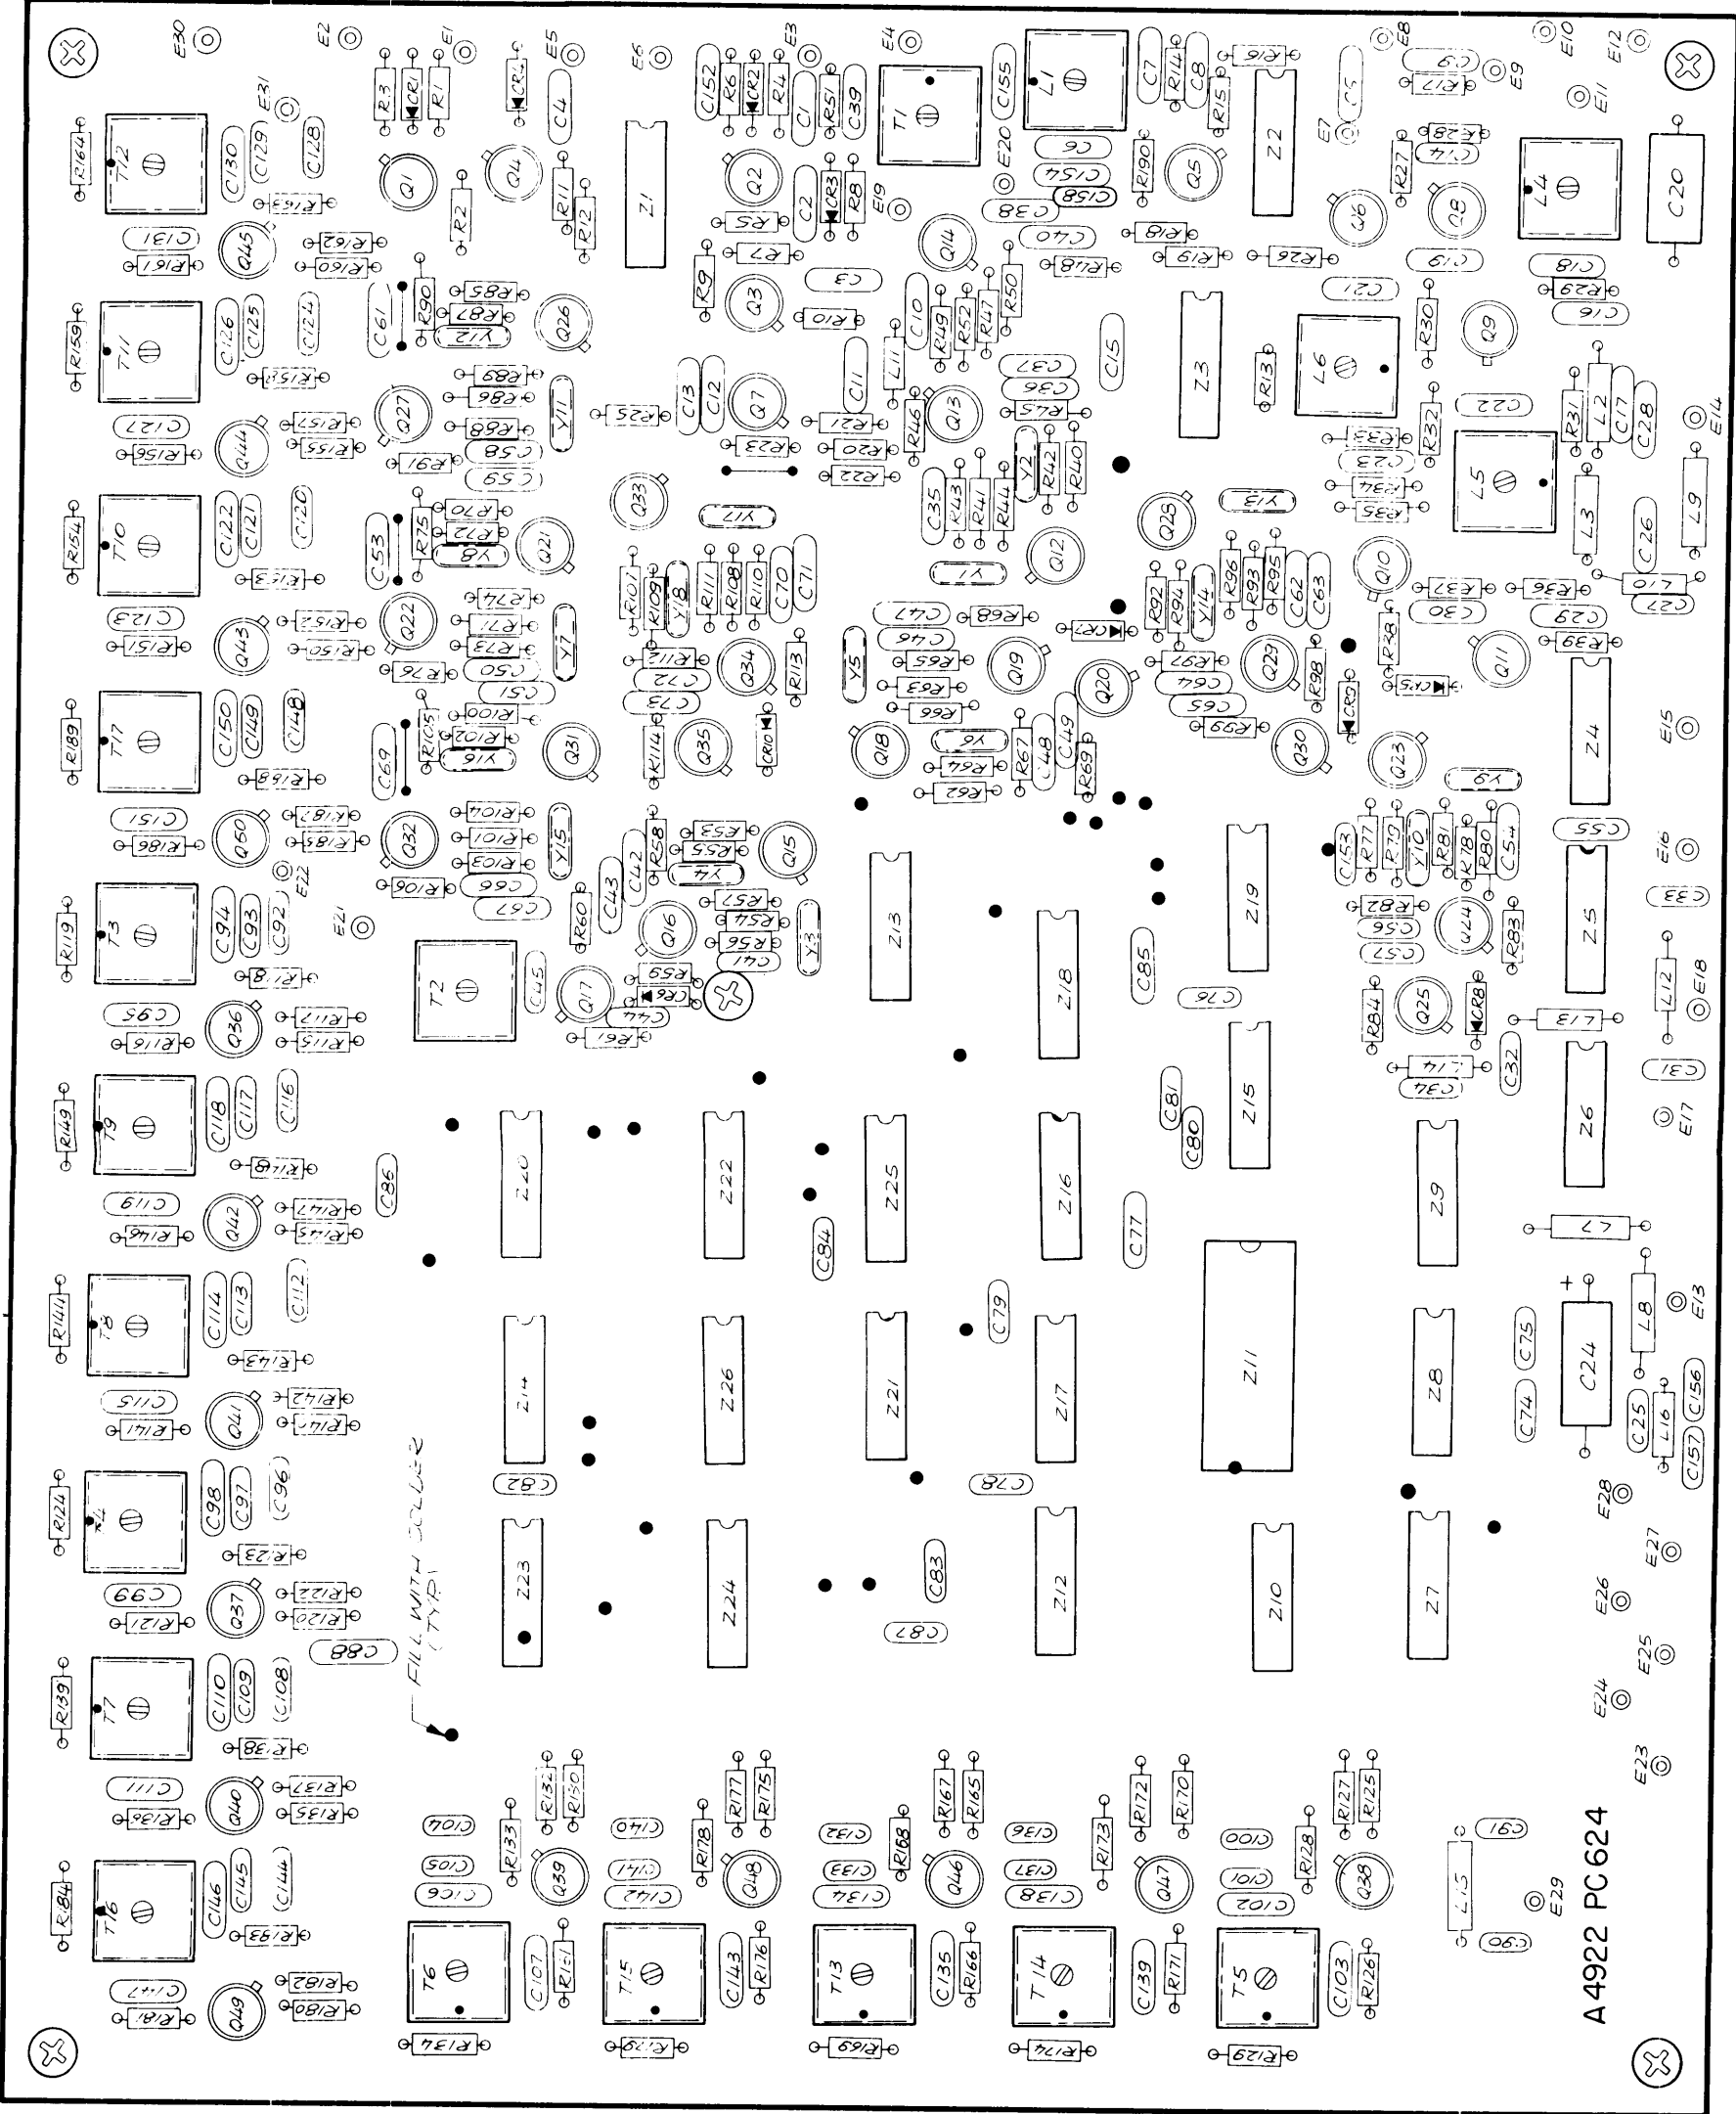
Spectrum Generator Assembly Z102, Component Location and Parts List (Sheet 2 of 3)
